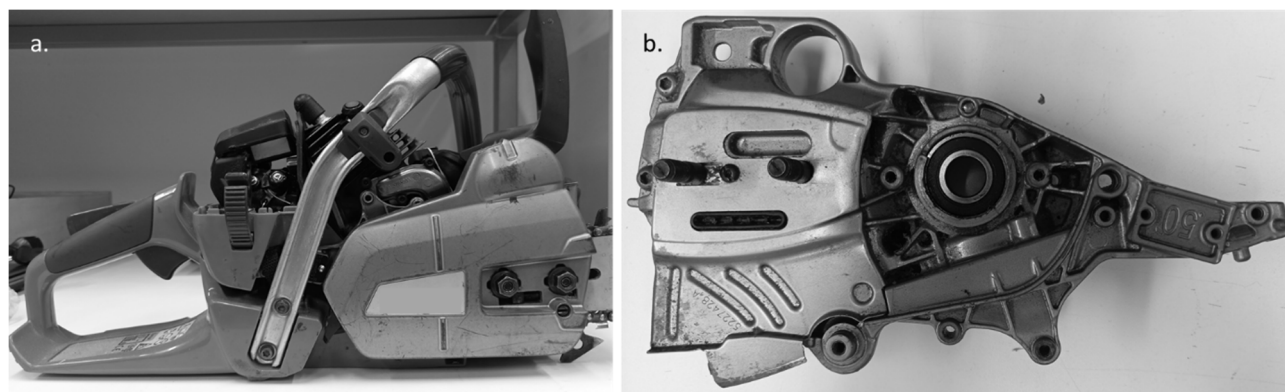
Engine part of a chainsaw (a.); detail of engine block (b.)
